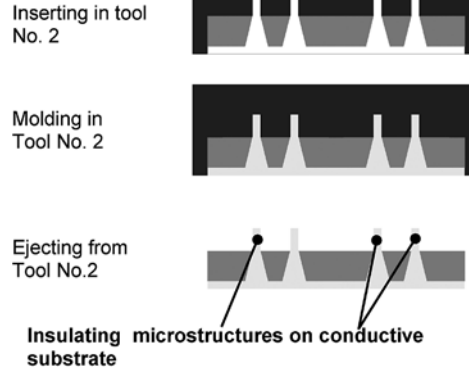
Scheme: Manufacturing of two-component injection molded preforms
